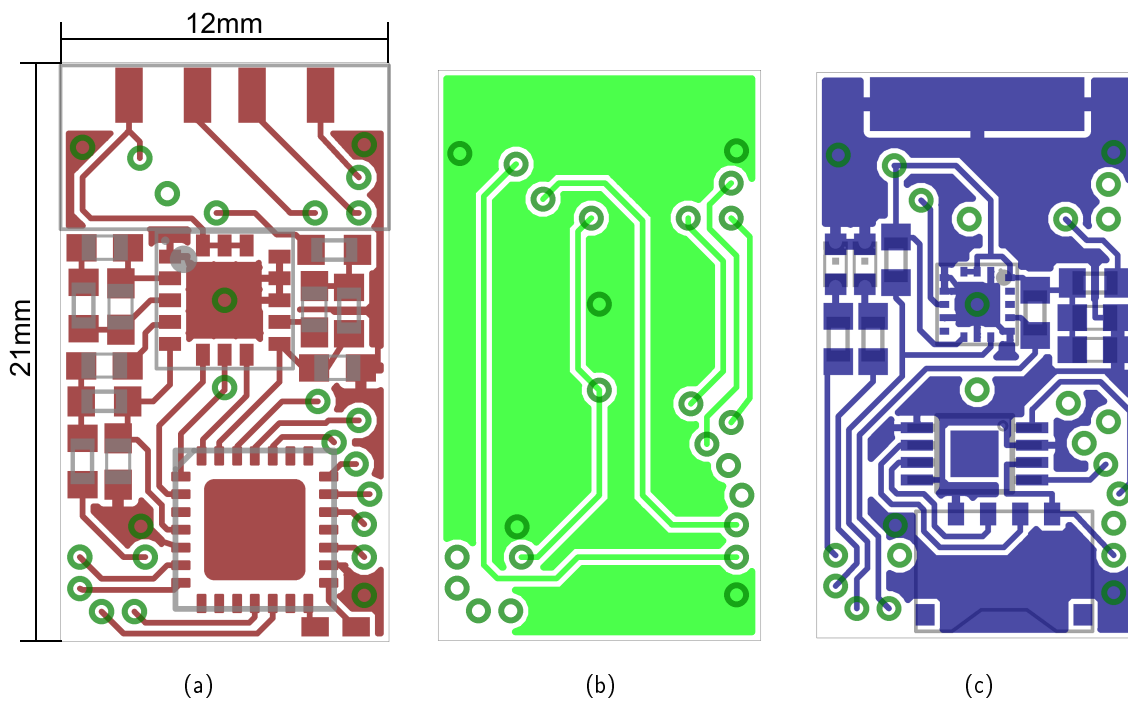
Sensor PCB layout: top (a), middle (b) and bottom (c)
